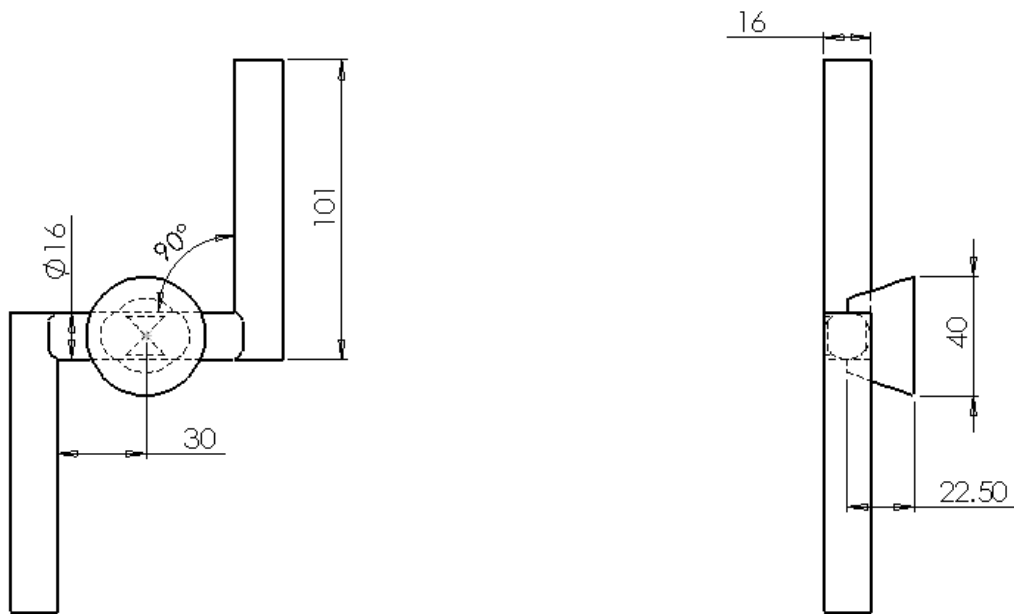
CAD drawing of mould pattern with cavity at 90° to inlet.
